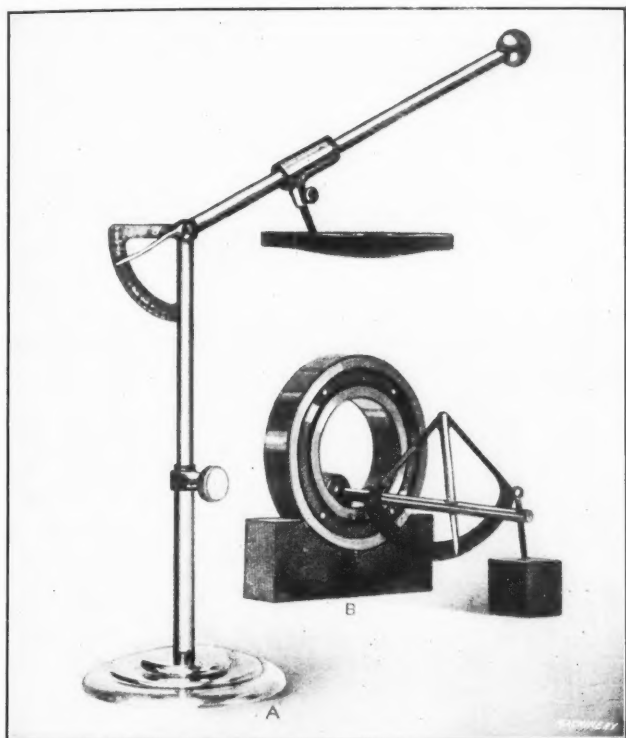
(A) Quadrant Sclerometer for testing Flat Surfaces
